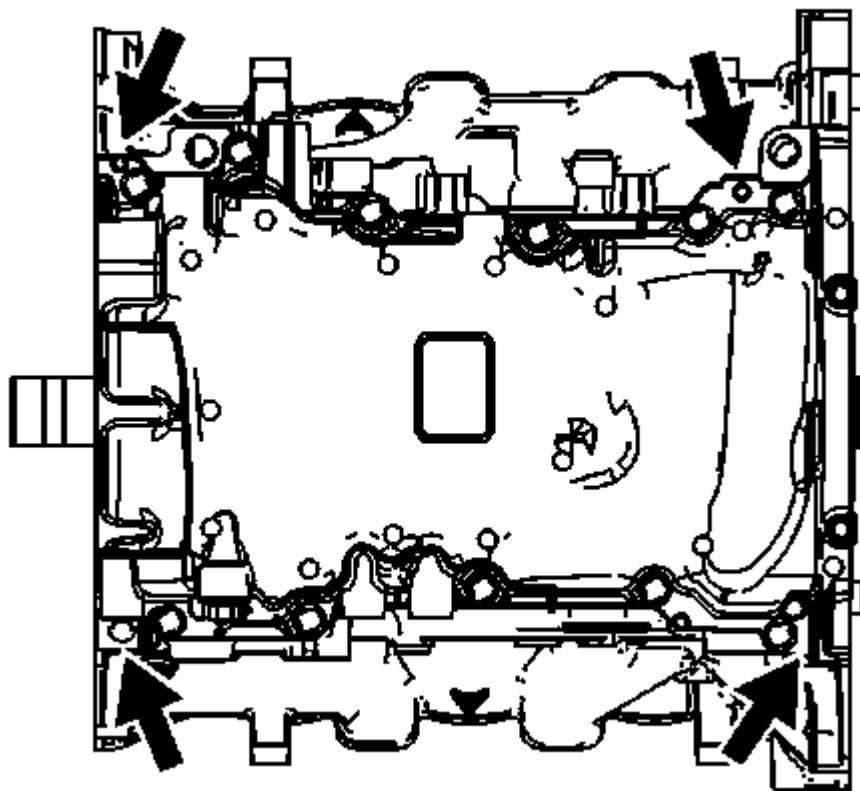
Identifying Oil Pan RTV Sealant Pry Points
